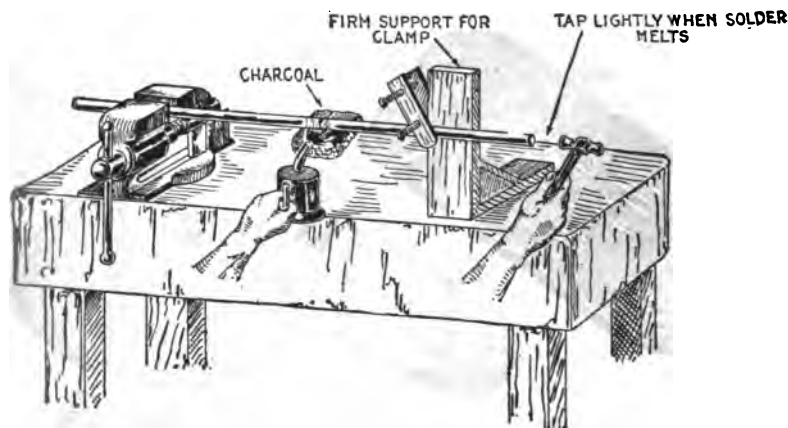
,637.—Butt brazing two lengths of small pipe. After cleaning the ends to be brazed and fluxing, they are clamped in position butt to butt using a vise and clamp as shown, or other means. A little brazing solder is sprinkled over the joint and heat applied. When the pieces are hot enough to melt the solder, it must flow into the joint, butt brazing the two pieces. By giving one of the pieces a slight tap on the end, when the solder melts, the surplus solder is squeezed out, making a good and firm joint. If the pipes be large or of considerable length, the heat is quickly conducted away, necessitating a charcoal backing or more adequate means of heating.
